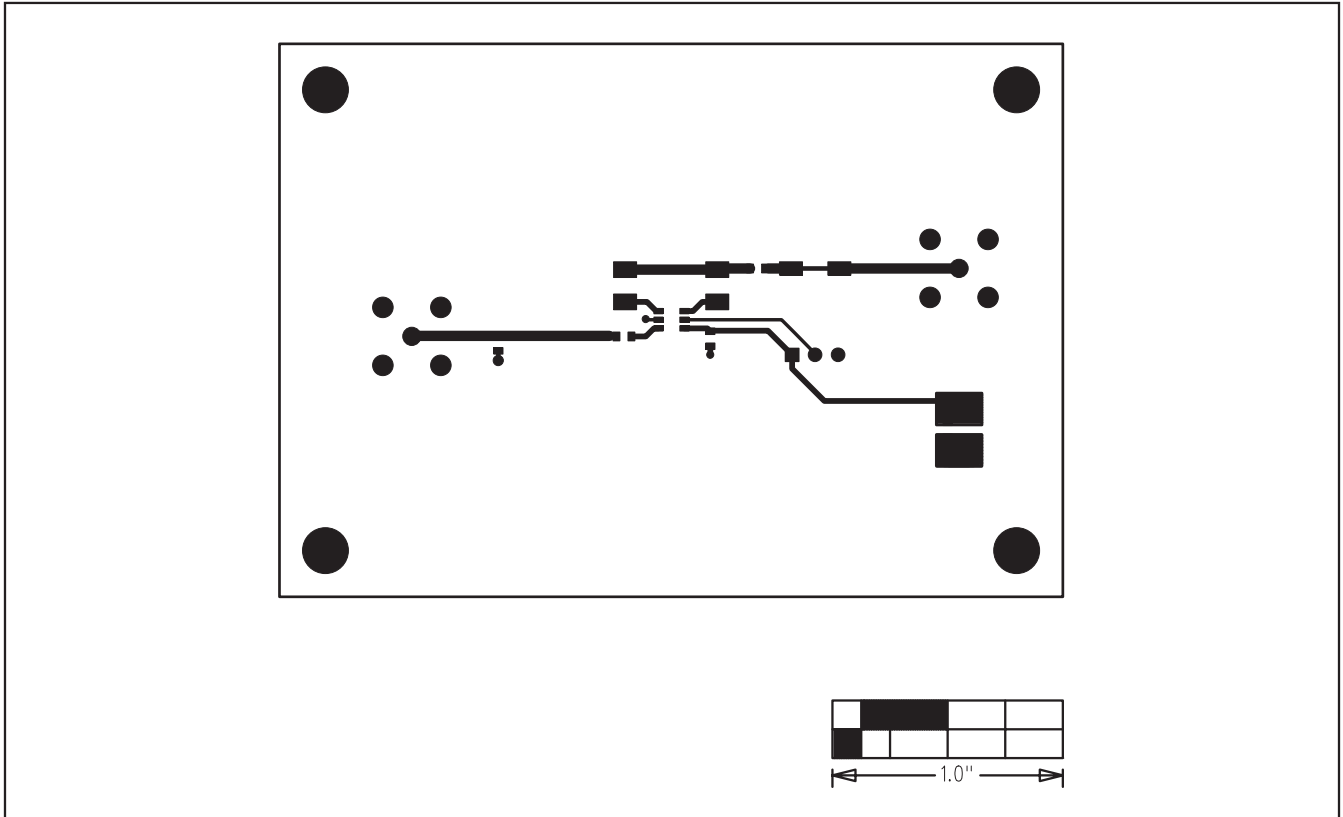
MAX4090 EV Kit PCB Layout—Component Side
